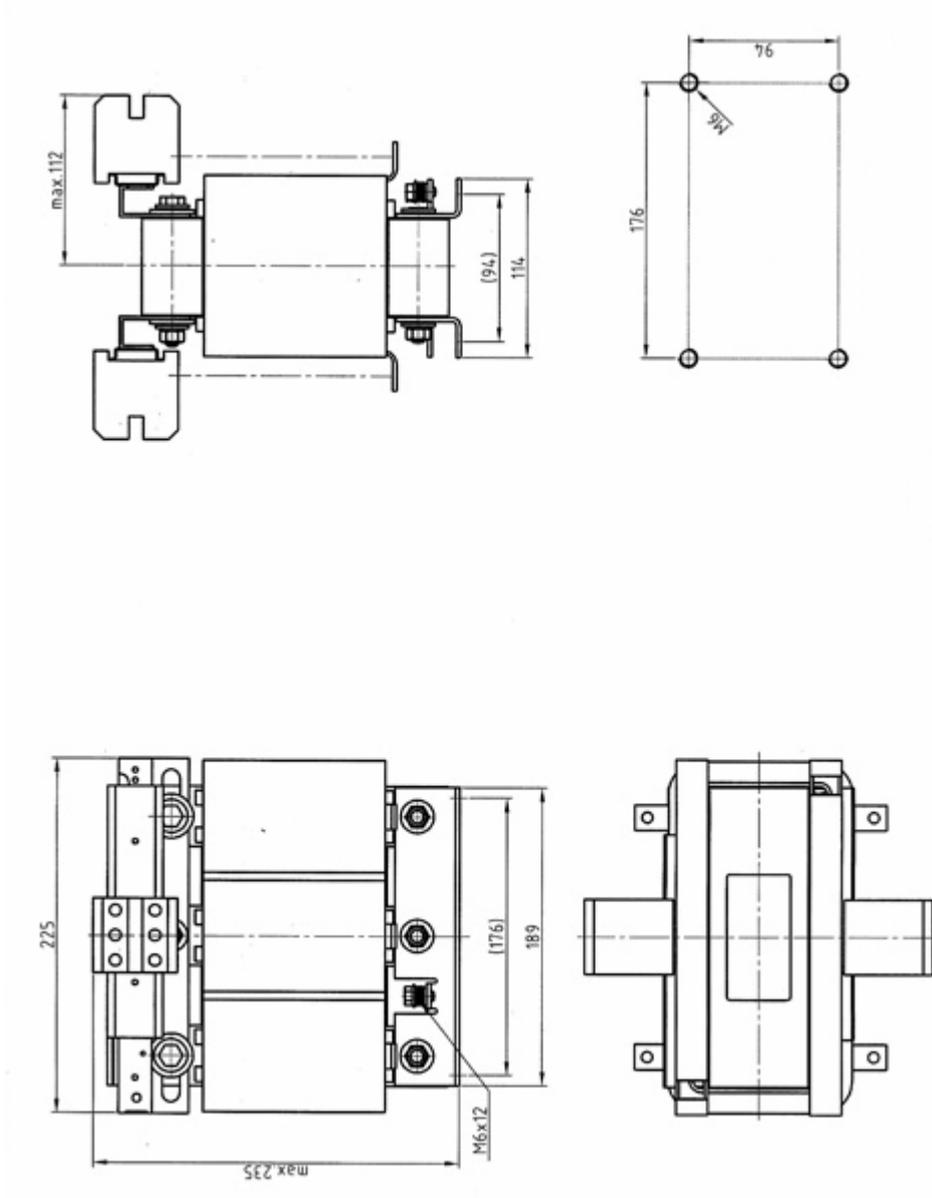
Dimension drawing of the line reactor for the Smart Line Module 36 kW
